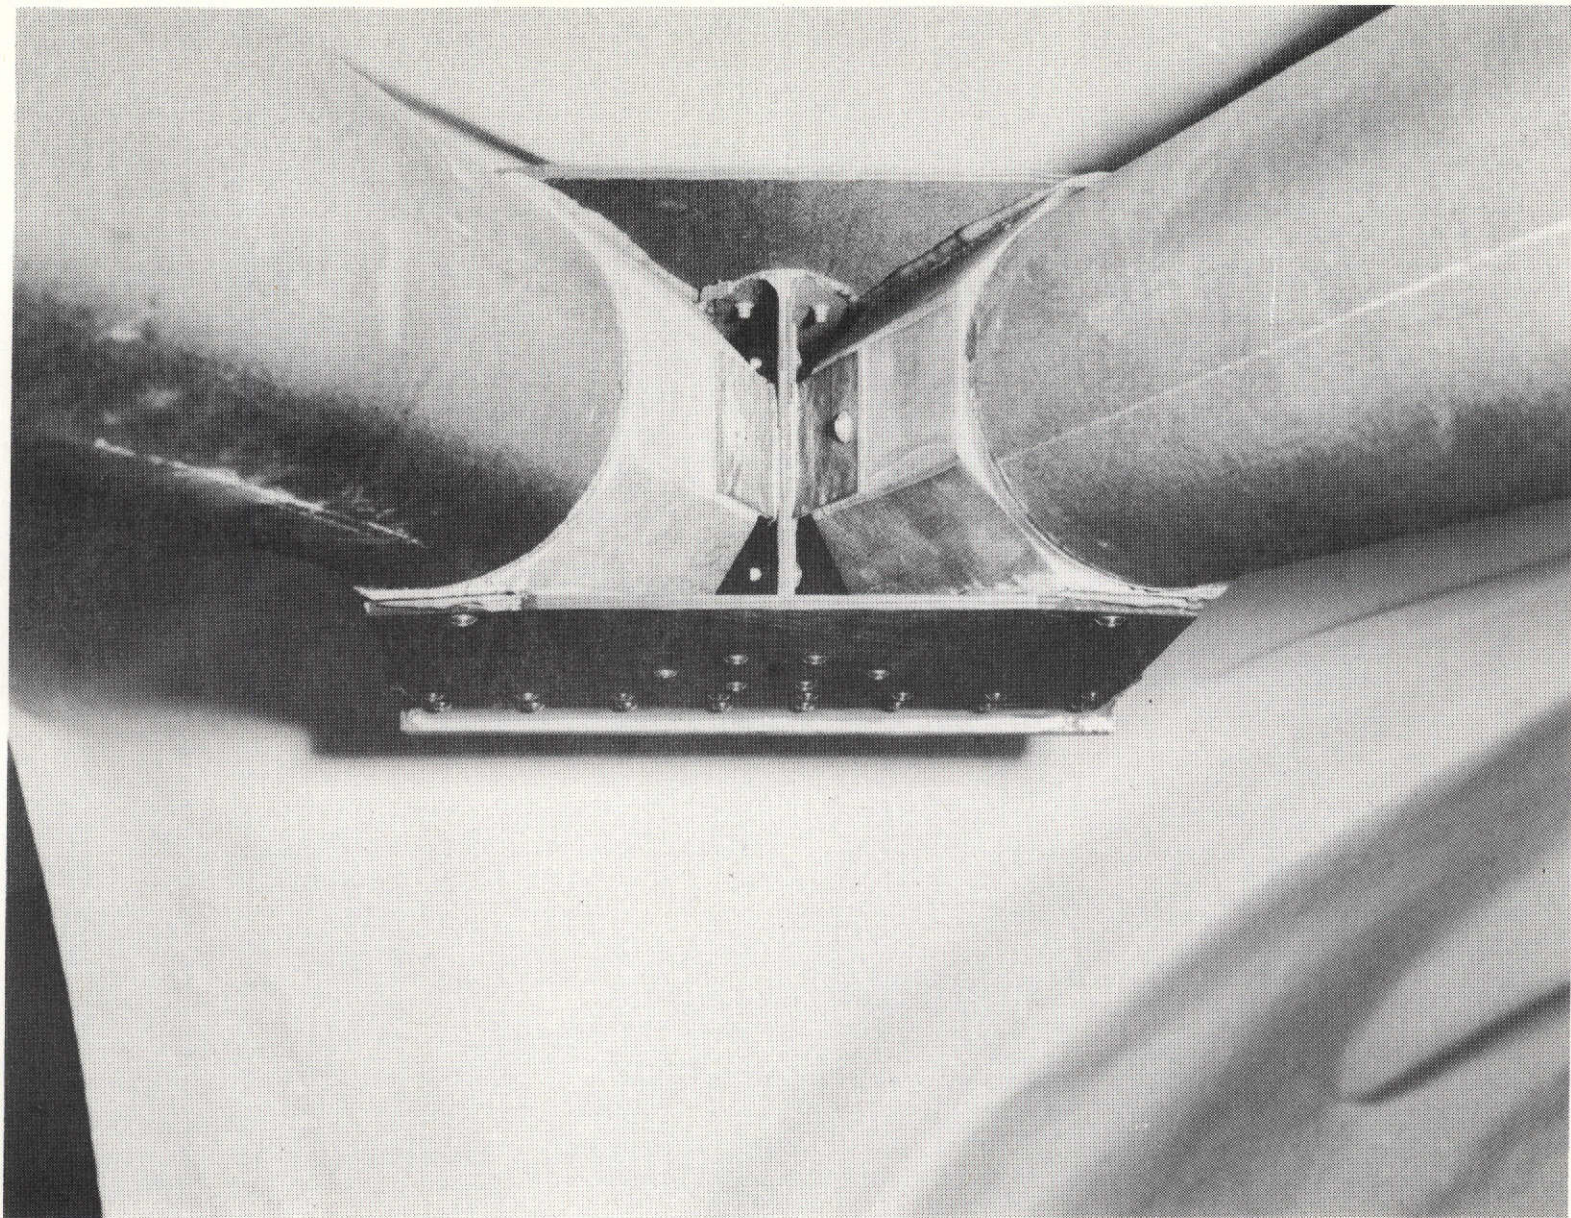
Completed Assy-Two Member Truss, Close-Up of Apex Fitting
